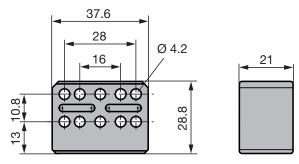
Installation dimensions of BTL6-A-3800-2 magnet
